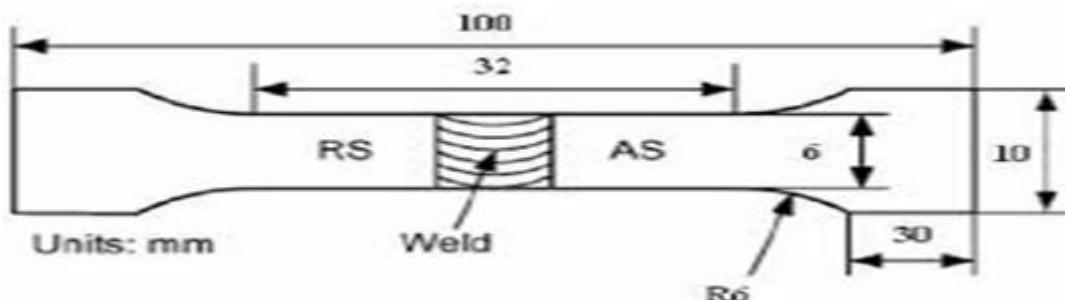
TEST SAMPLES FOR TENSILE TESTING
